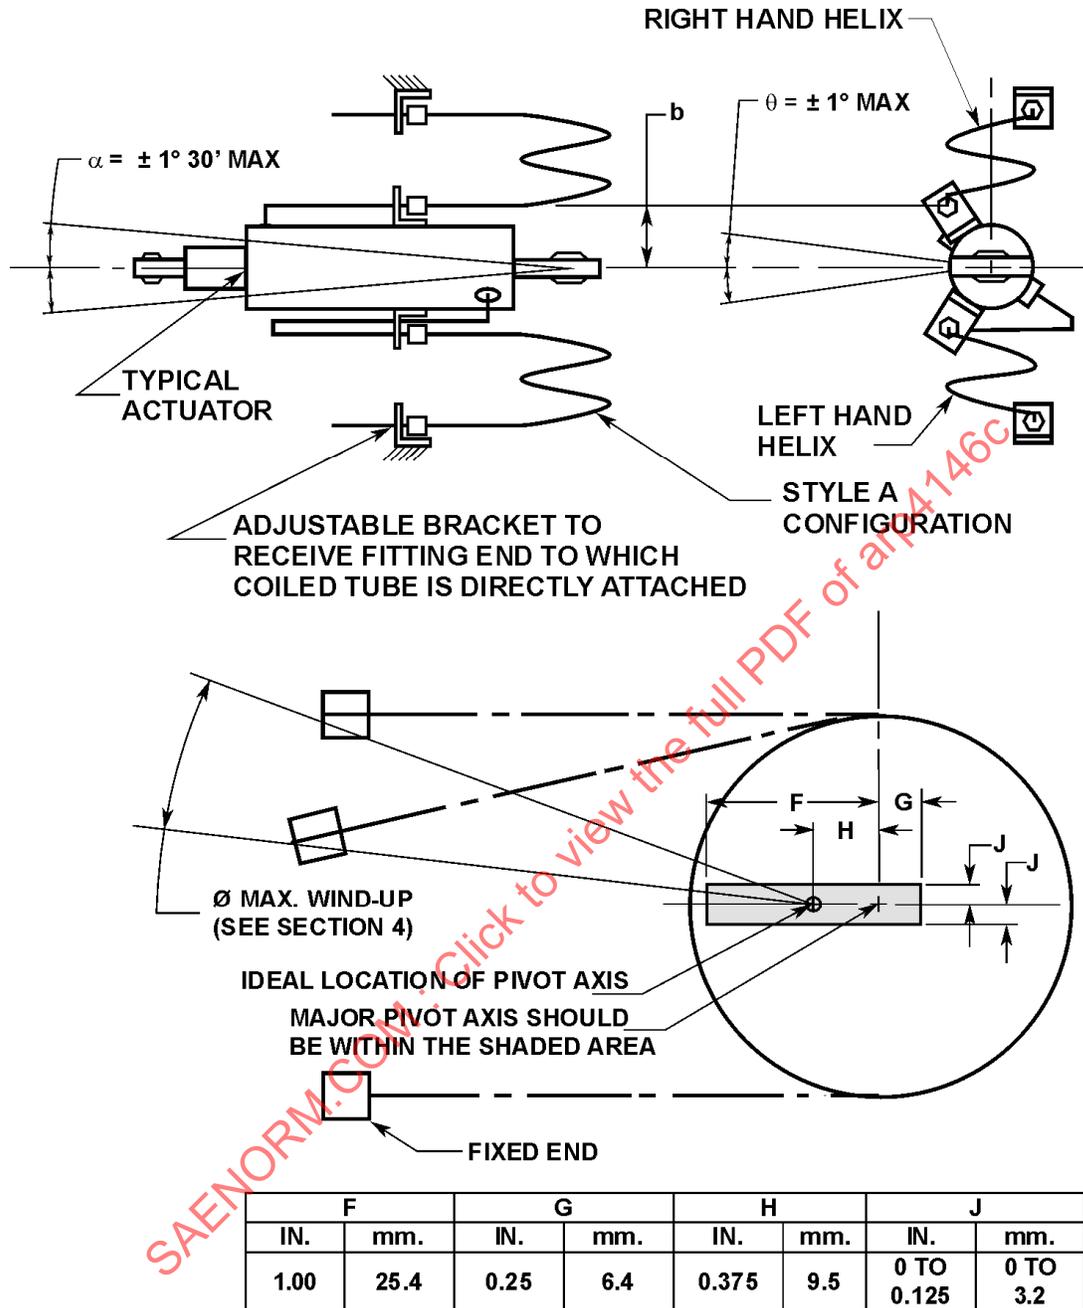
CENTERLINE LIMITS FOR STYLE A COILED TUBE INSTALLATION
